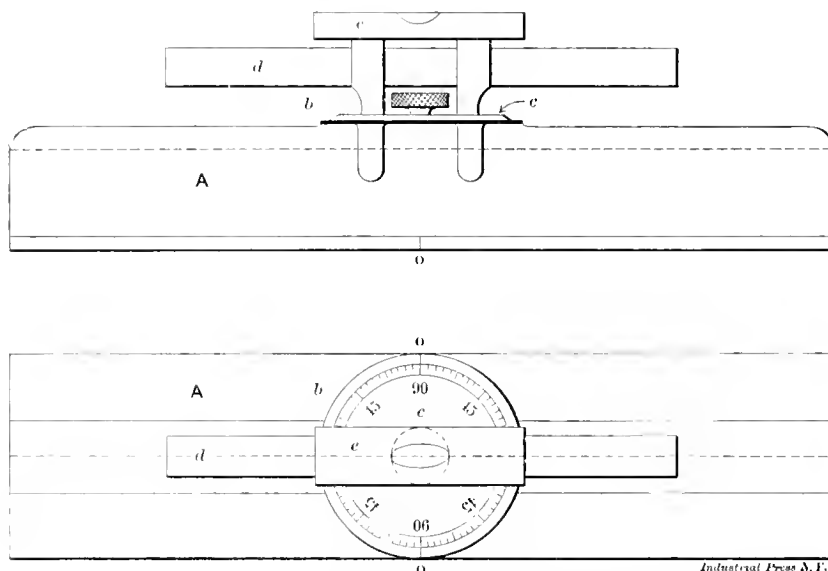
Leveling Instrument for Aligning Shafting and Machinery.
